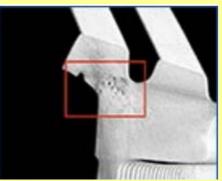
Processed car wheel and porosity found in casting of it.
